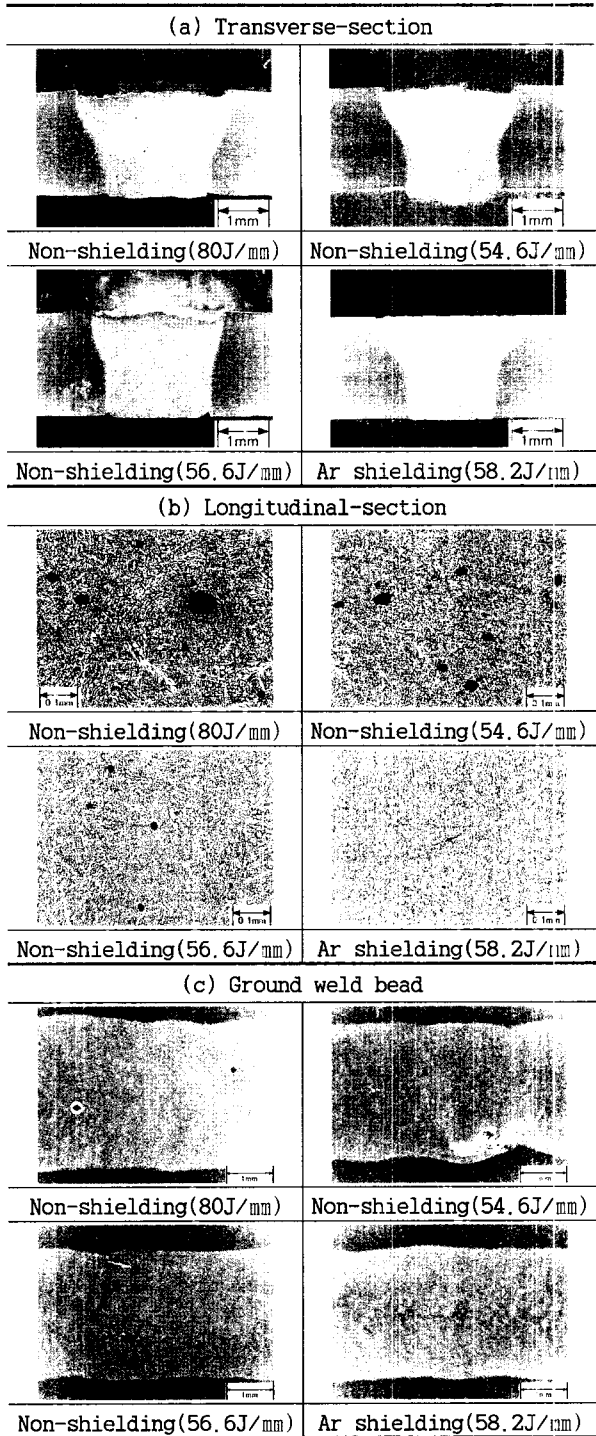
Polished, etched weld section and beads of 6061 aluminum alloy laser welds.
